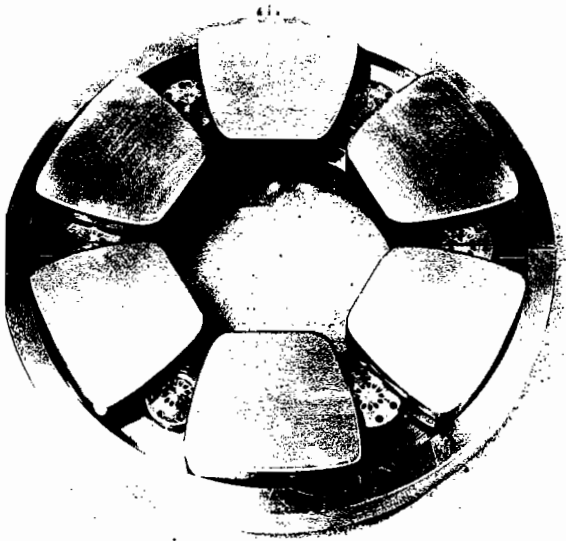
Tilting Pad Thrust Bearing Fitted with Directed Lubrication.
